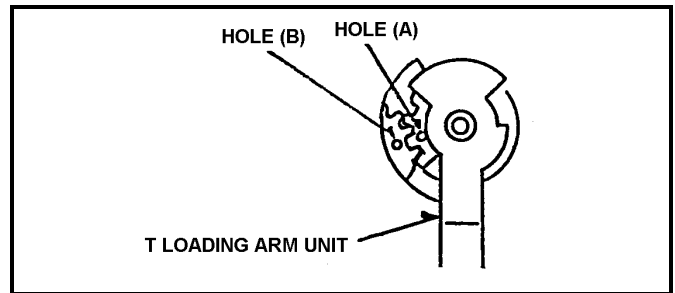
Phase Adjustment of T1 Loading Arm Unit
